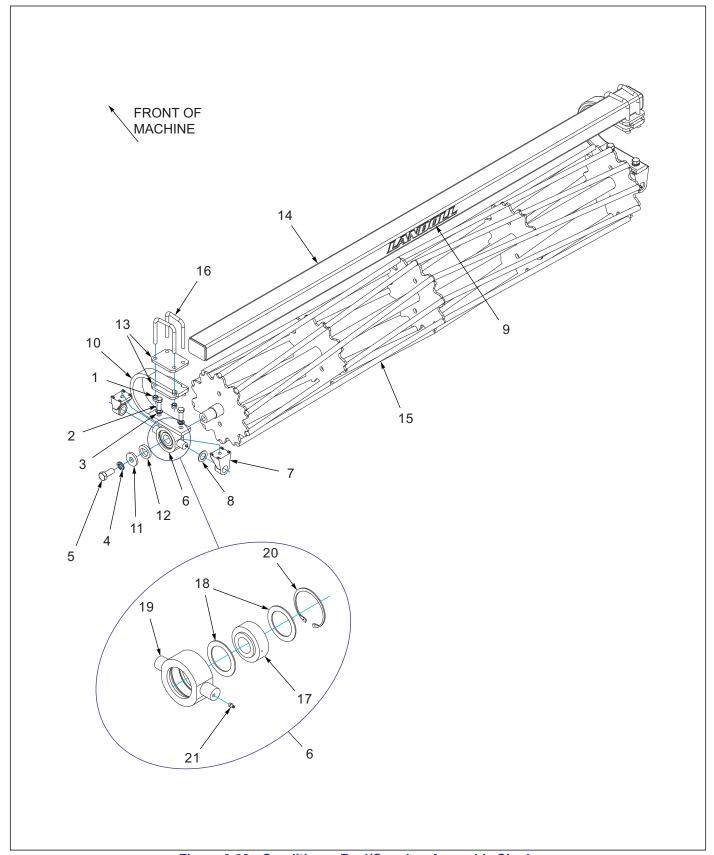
Conditioner Reel/Gangbar Assembly Single
